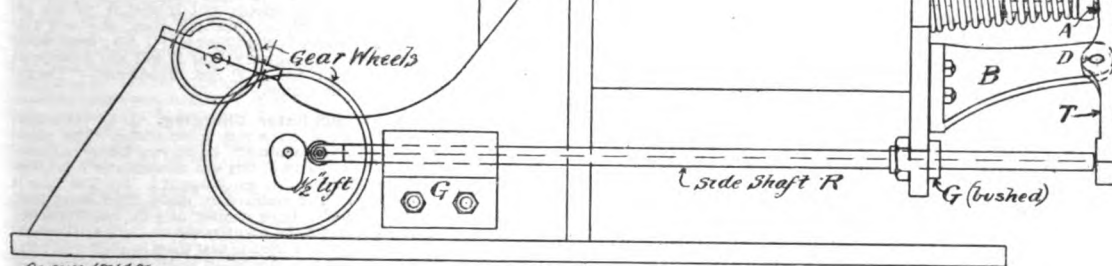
SHOWING ARRANGEMENT FOR WORKING EXHAUST FROM EXISTING GEAR WHEELS.
